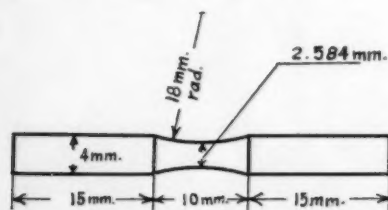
Test Specimen for Multiple Spindle Machine.
